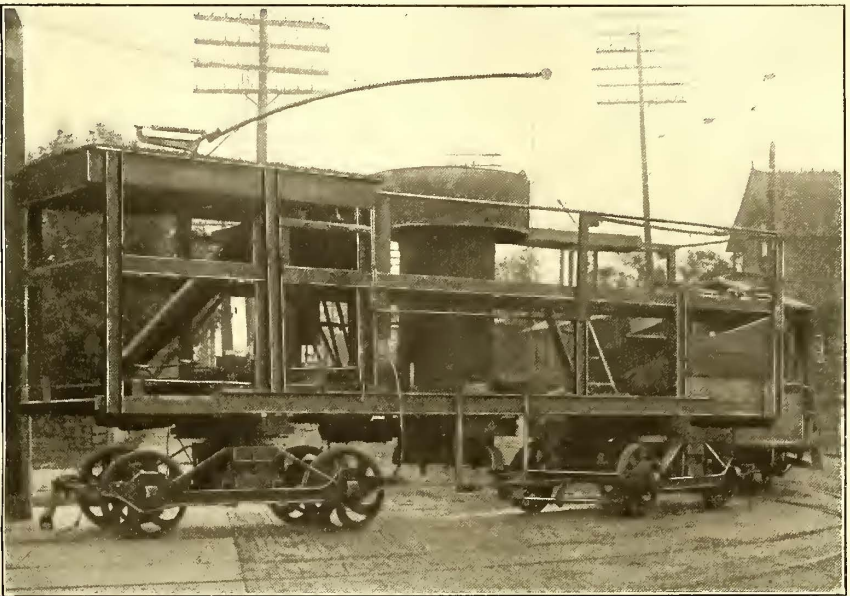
HOME-MADE CAST WELDING CUPOLA CAR
